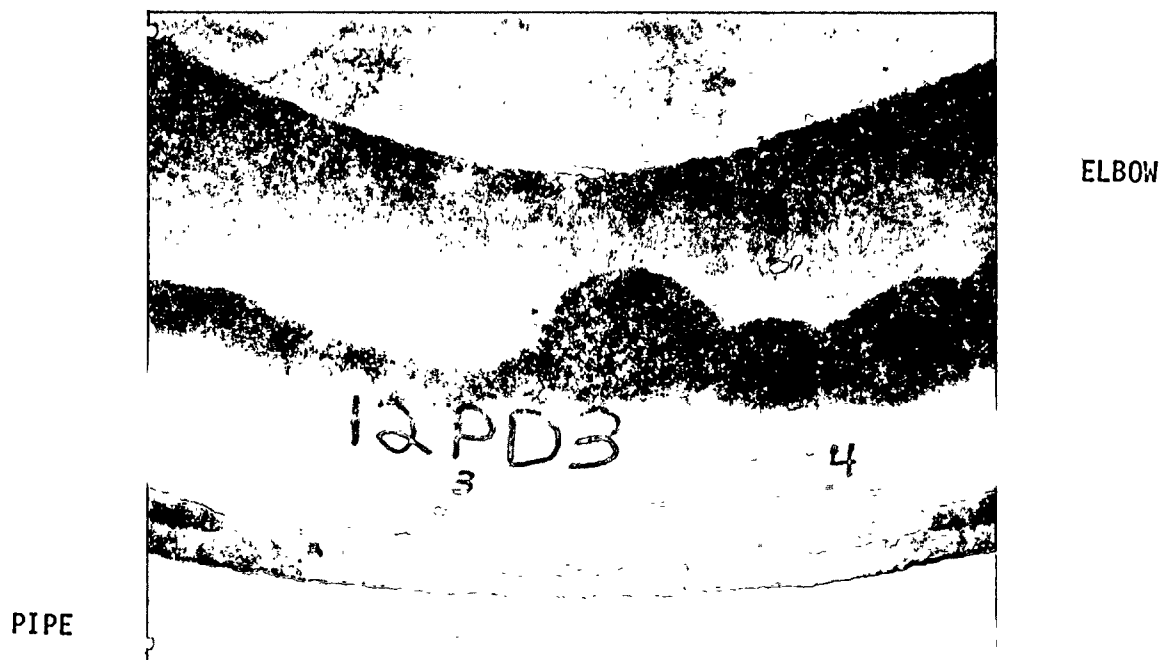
Loop 12 Pump Discharge Weld No. FW-31. Weld HAZ indications on side surface of pipe and elbow.
